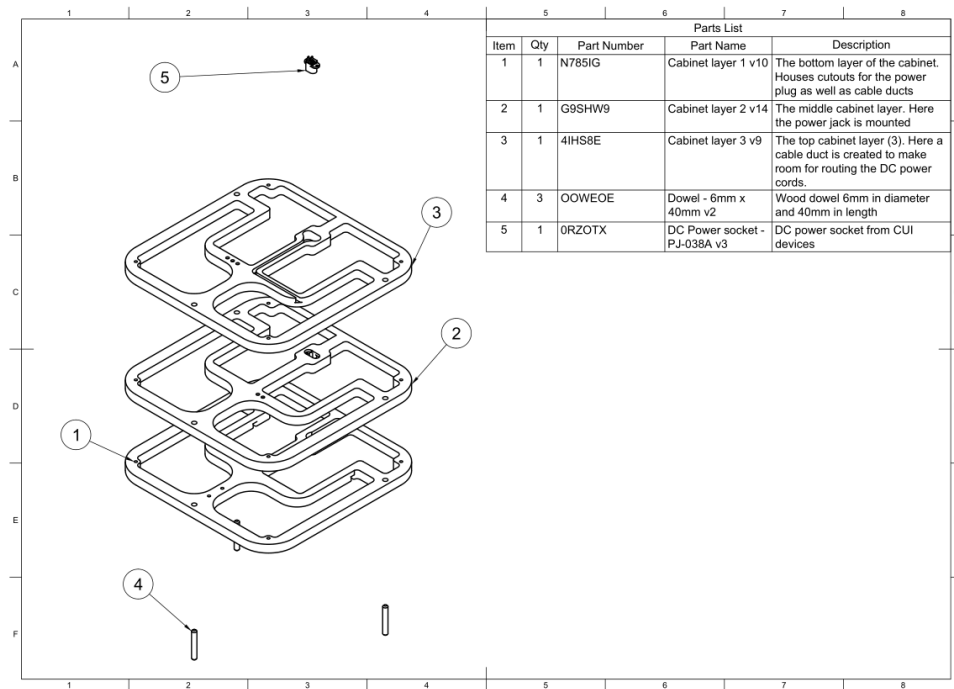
Exploded view of all the parts needed to assemble the main cabinet.
